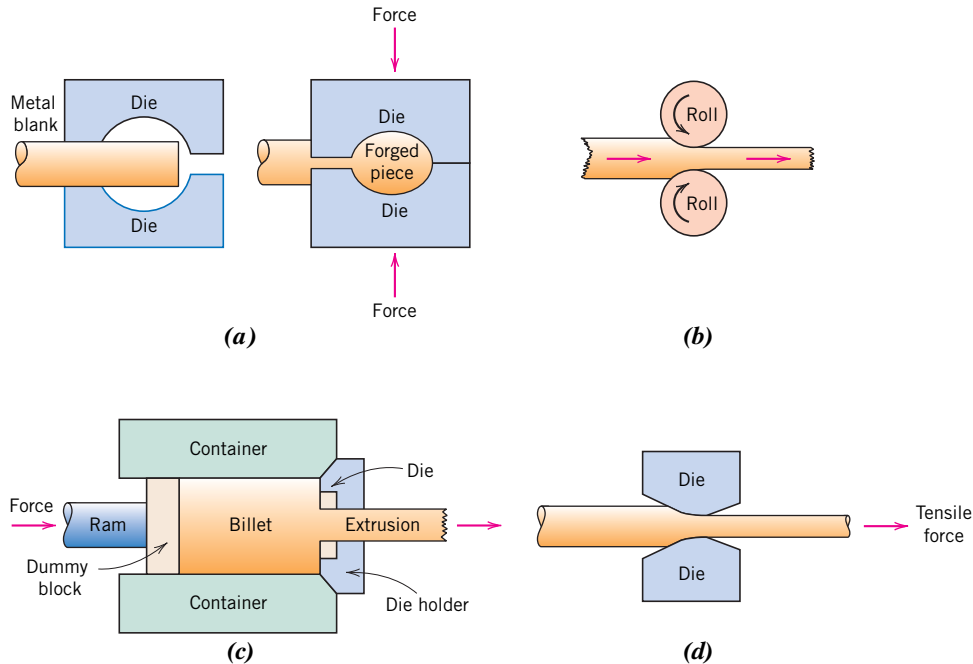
Metal deformation during (a) forging, (b) rolling, (c) extrusion, and (d) drawing.
